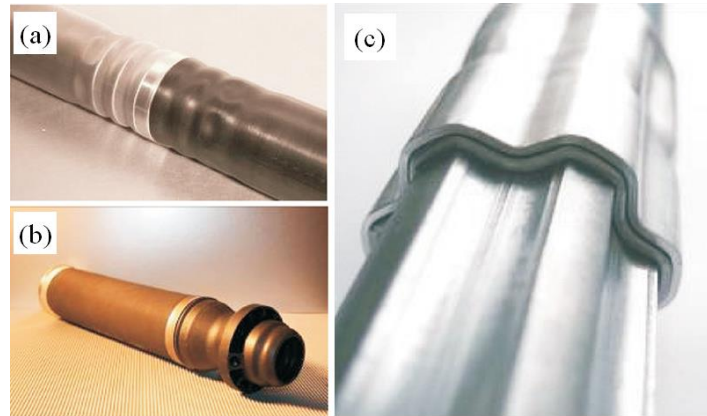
(a) Al/steel crimped tube for instrumental panel beam (b) crimped air suspension, (c) crimped drive shaft [20].
